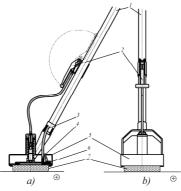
General view of external electrode (its operating part): side view (a) and front view (b)
